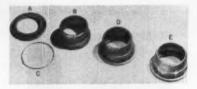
AUTOMOTIVE CLUTCH SLEEVE ASSEMBLY
